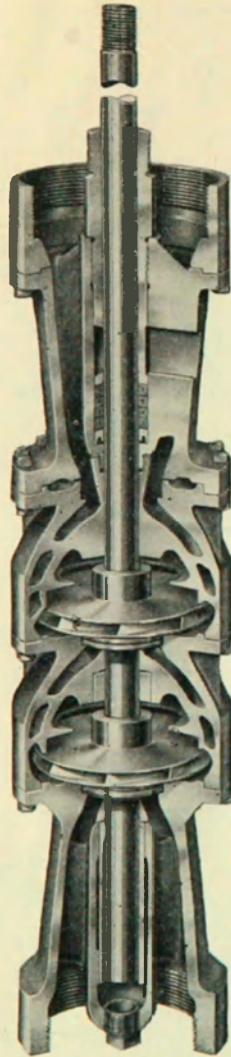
Deep-well centrifugal turbine pump bowl assembly showing bottom bearing, impeller, intermediate bearing, upper packing gland, drainport, and last shaft bearing.
